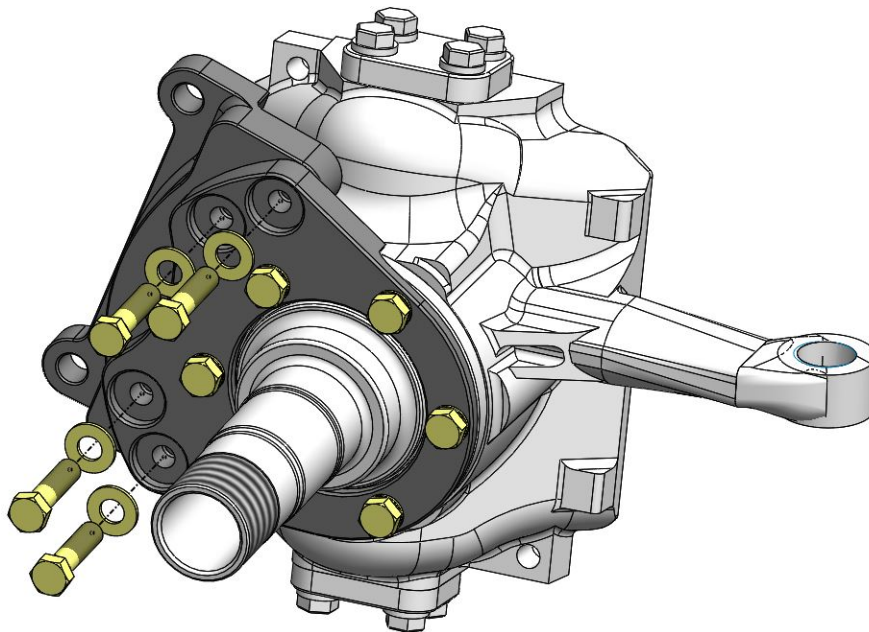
Installing the Secondary Caliper Mounting Bracket
